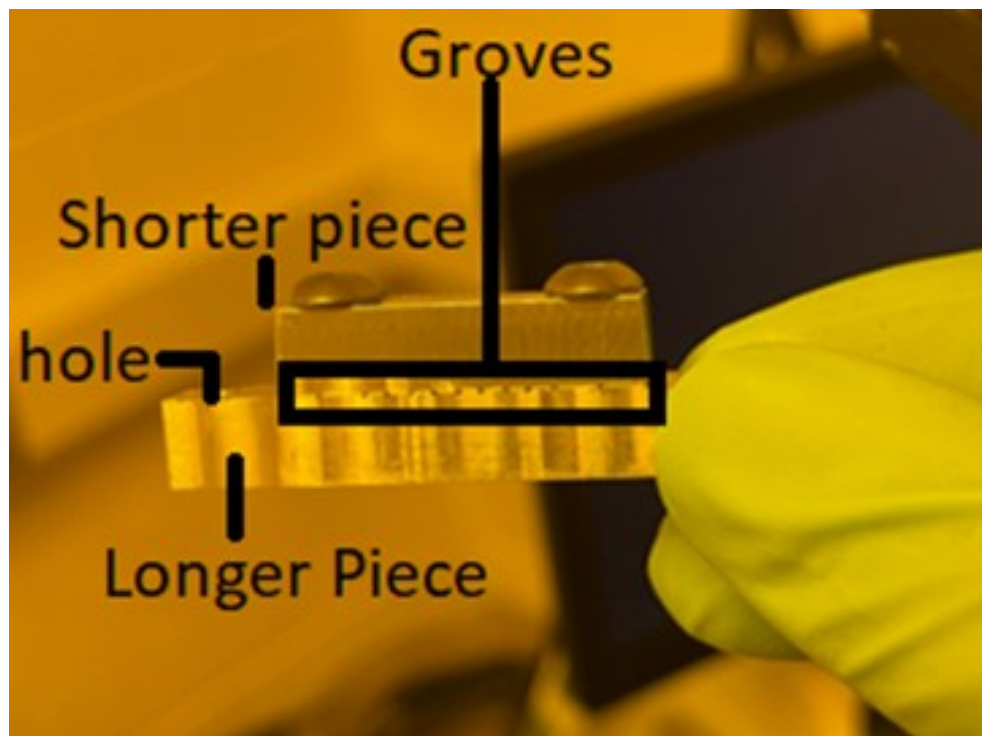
Mounting SM fiber: 2nd trial-this time fiber chuck was avoided and the clamping was ensured inside machined groves. It was carefully done so that fiber is not damaged from too tight clamping.
